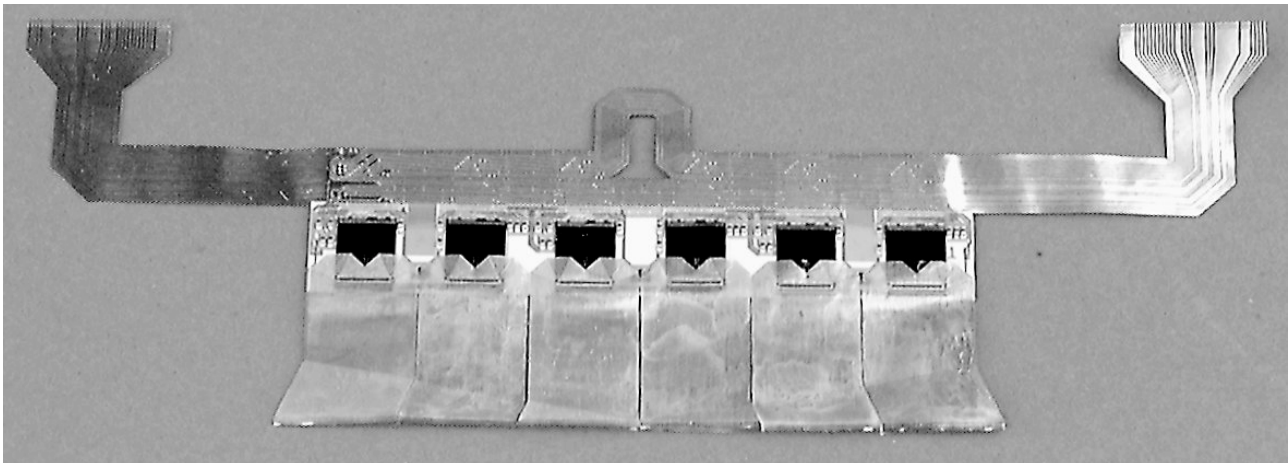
Alice doublesided hybrid with input cables and output bus cables.
